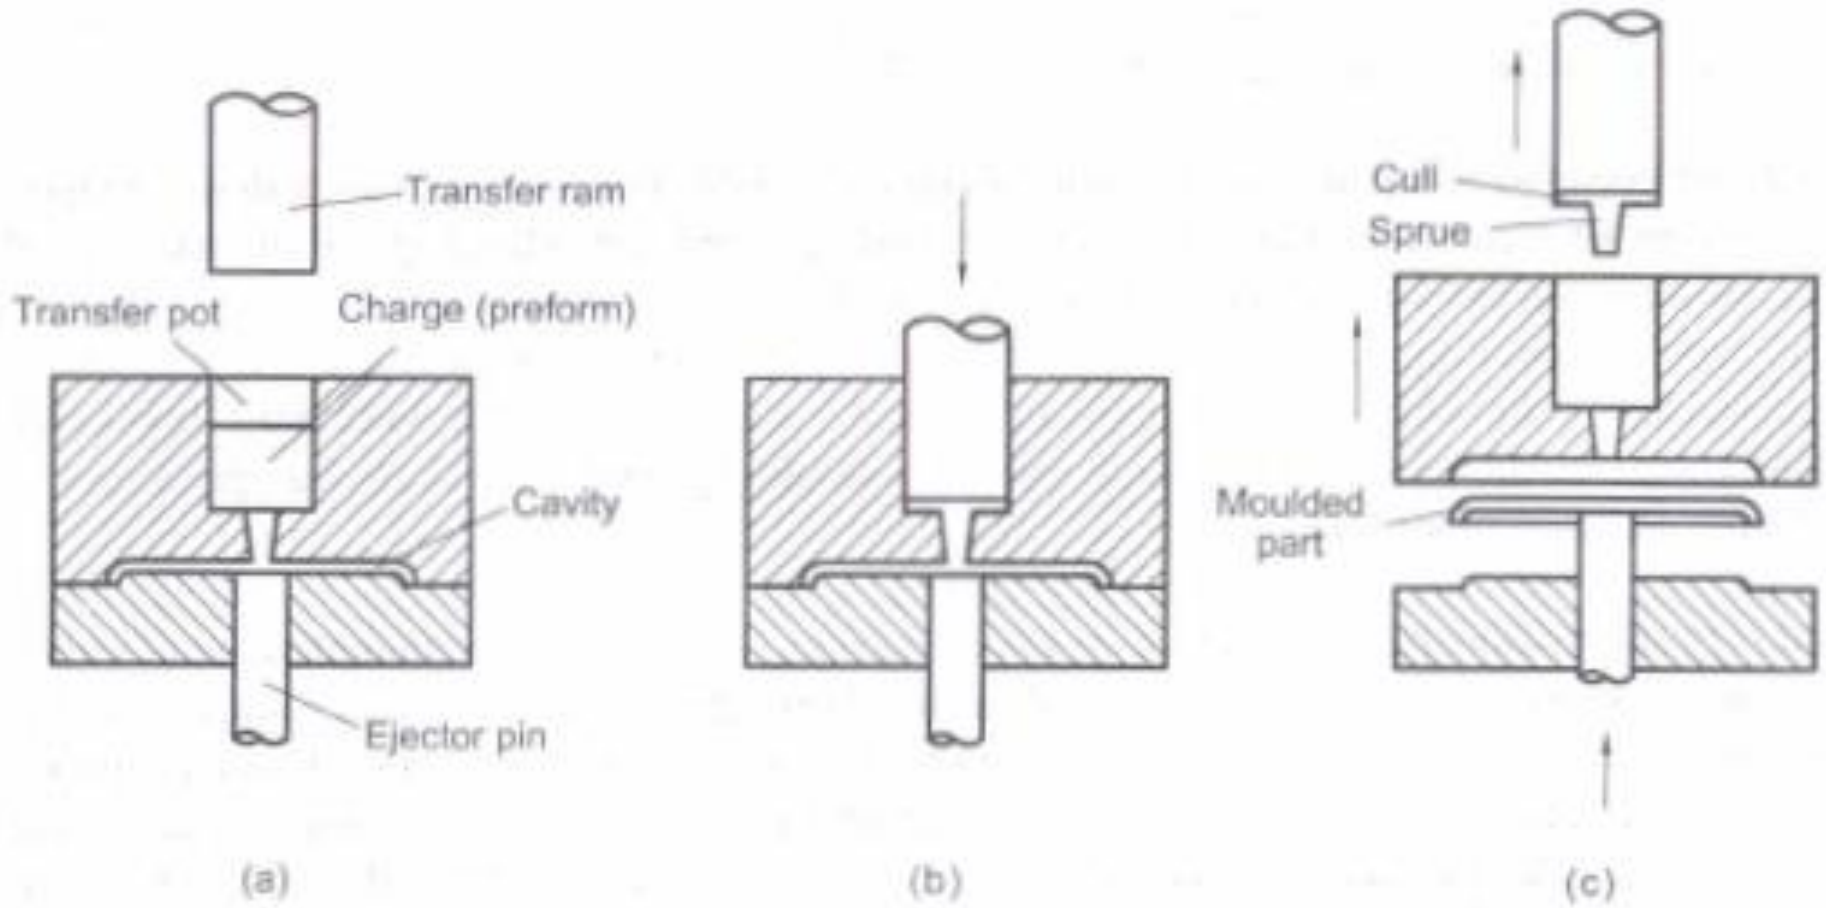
Steps in transfer moulding for thermosetting materials
